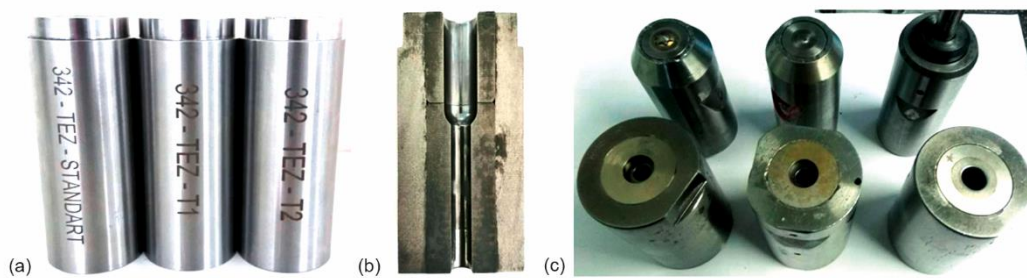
Produced extrusion dies and test die set; (a) extrusion dies with different forms, (b) cross-section of the produced extrusion die, and (c) experiment die set used in sample production
